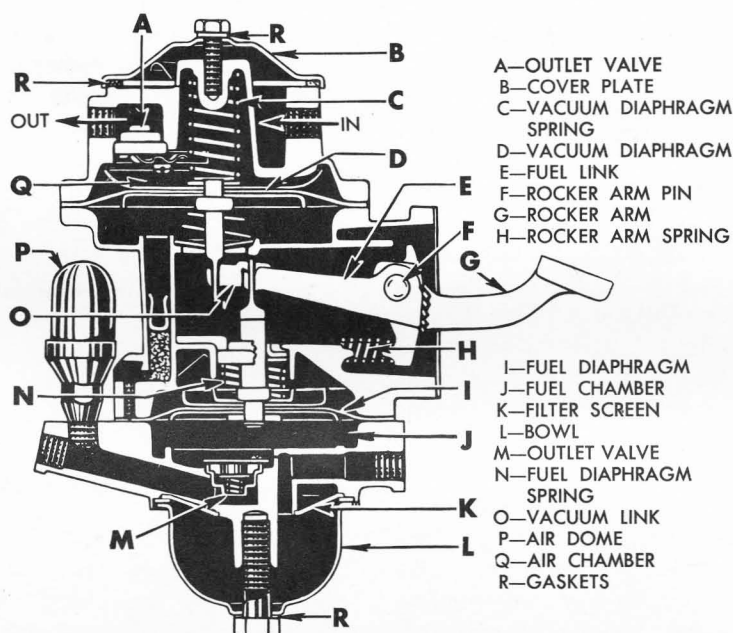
Combination Fuel and Vacuum Pump—Sectional View
